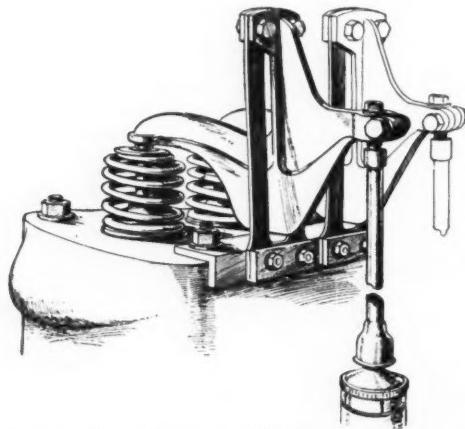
The valve rocker design of the Straker-Squire truck which eliminates rubbing surfaces.
